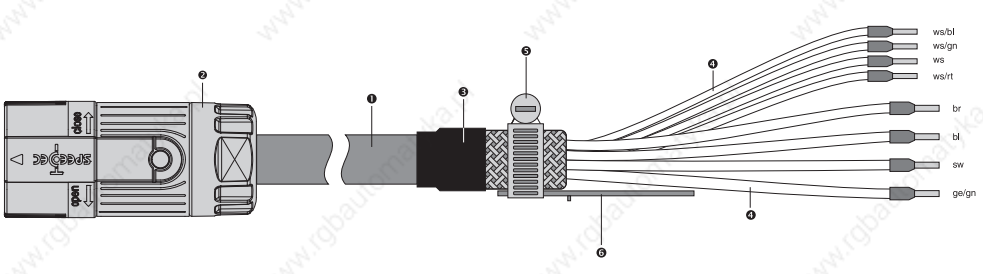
Cable schematic - Motor cable 8BCMxxxx.1111A-0, 8BCMxxxx.1312A-0
